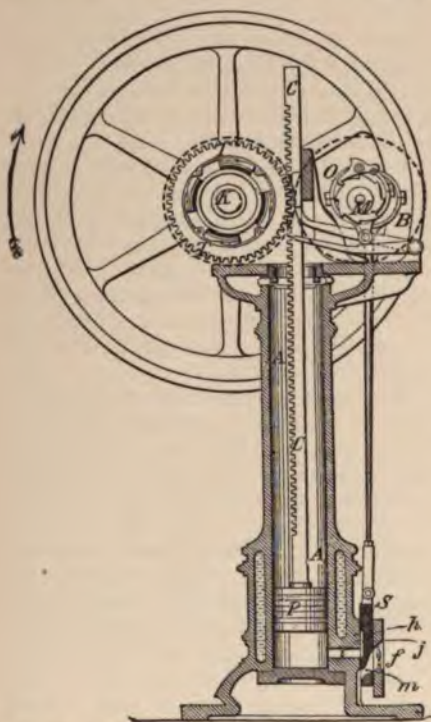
Otto and Langen Vertical Engine—Transverse Section.
